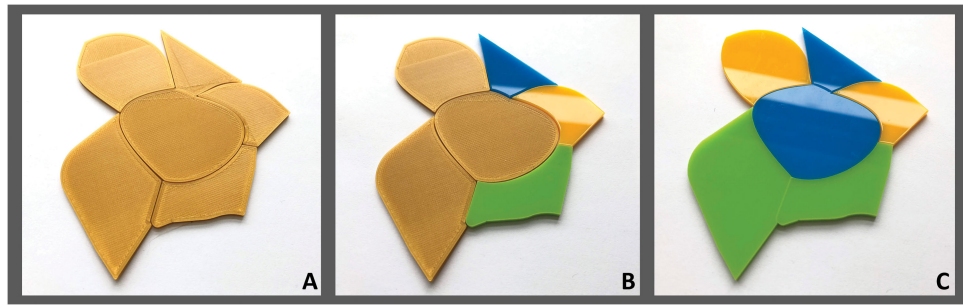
Comparison of the precision and finish quality differences between 3D printed puzzle pieces (A) and laser-cut tangram pieces (C). The 3D printed parts have a rougher finish and do not match the perfect fit of the laser-cut puzzle pieces.
